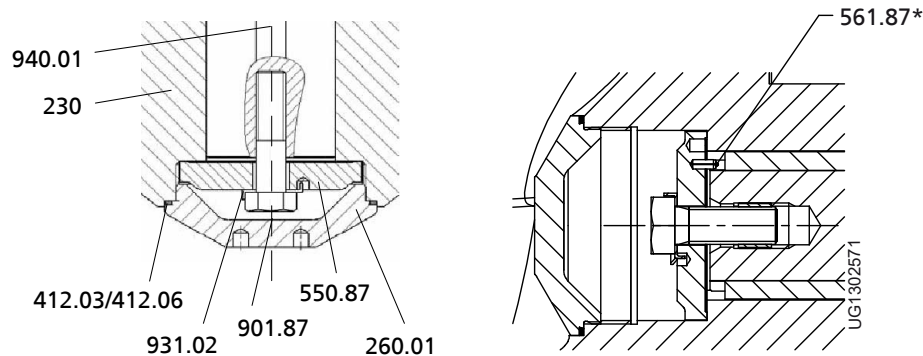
Removing K and E impellers with impeller screws M100, M125 or M160
